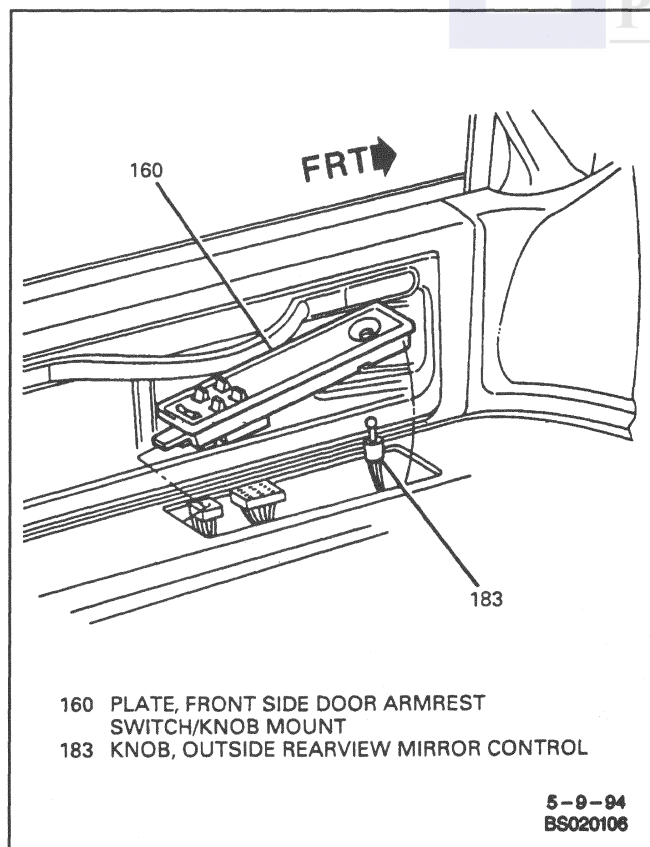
Removing Front Side Door Armrest Switch/Knob Mount Plate-(Buick)
